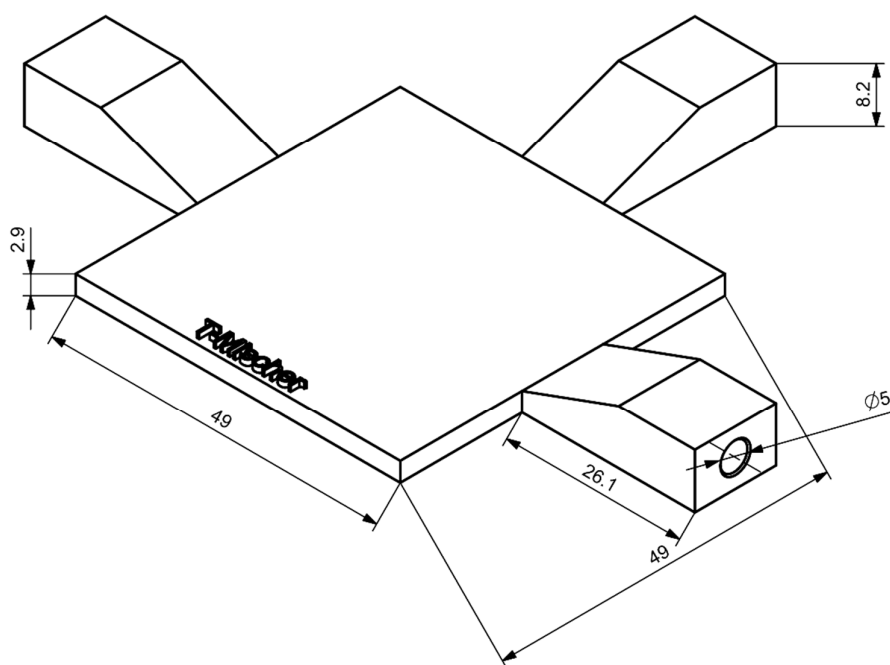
Dimensions (mm) of the mixer with T-geometry.
